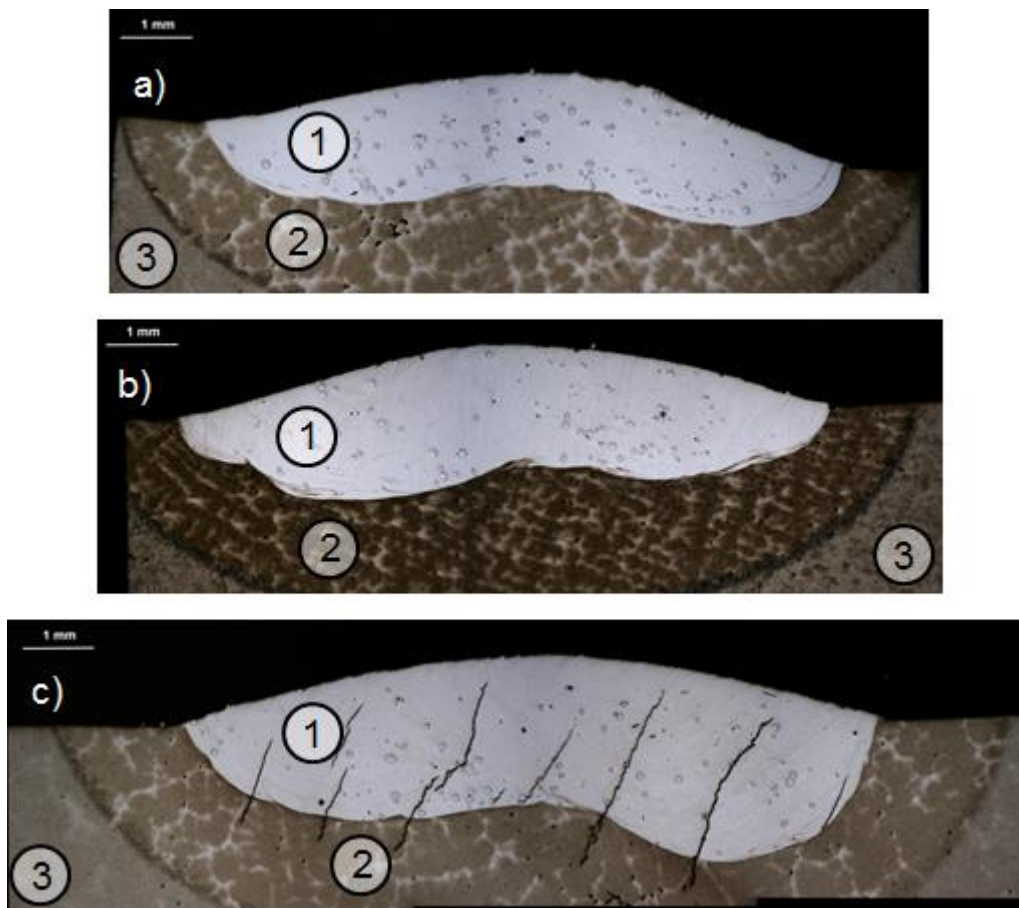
Microsections of single bead welding seams in bead-on-plate mode with 15 g/min WC powder feeding rate and constant electrode angle, 1: weld bead, 2: Heat Affected Zone (HAZ), 3: base material, surface in figure 6-5; shielding gases: a): 100 % Ar; b) 50/50 Ar/He; c) 100 % He
